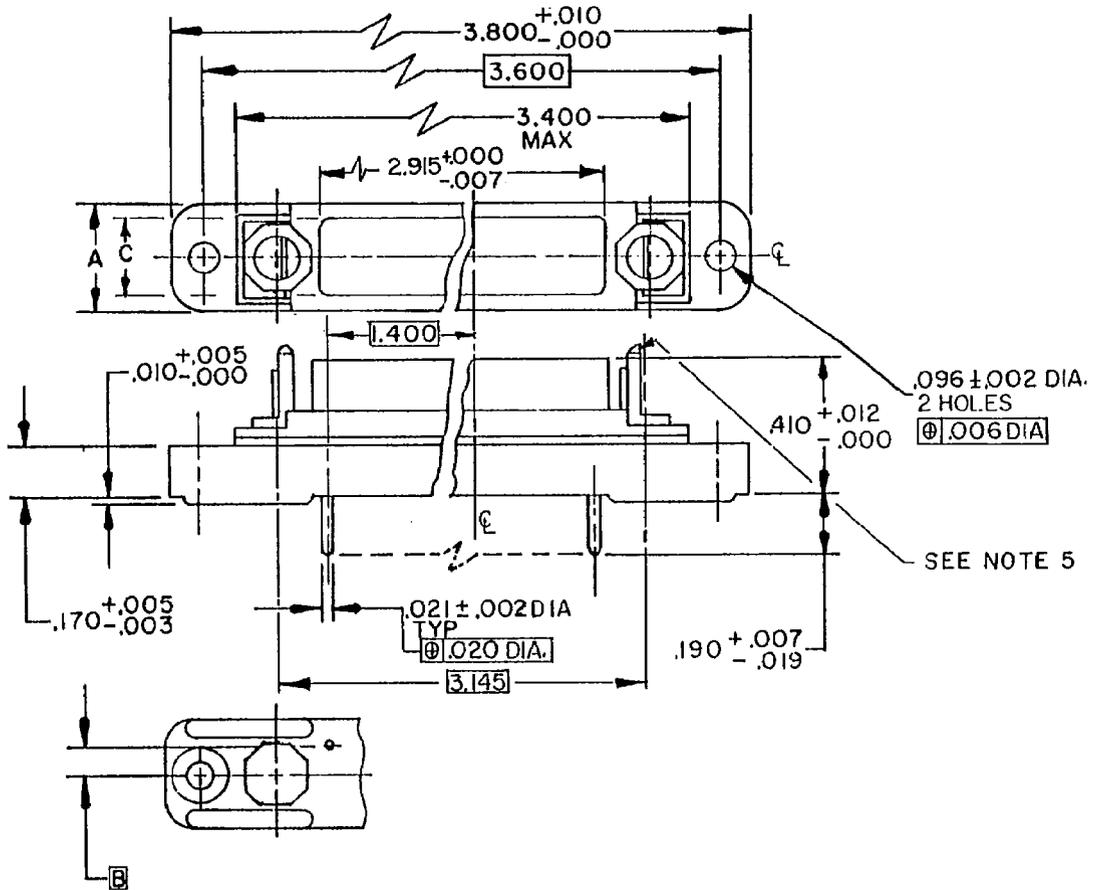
Connector, socket, straight-thru, for multilayered printing wiring boards .100 (2.54 mm) spacing.
